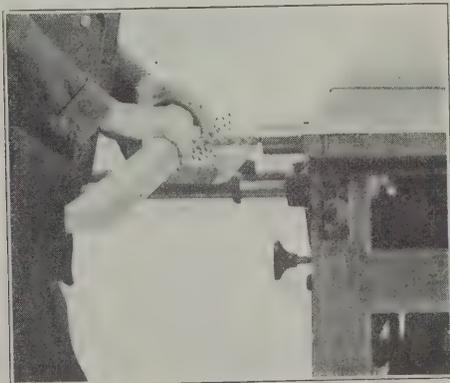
The Boring Attachment of the "Eveready" Saw Rig
